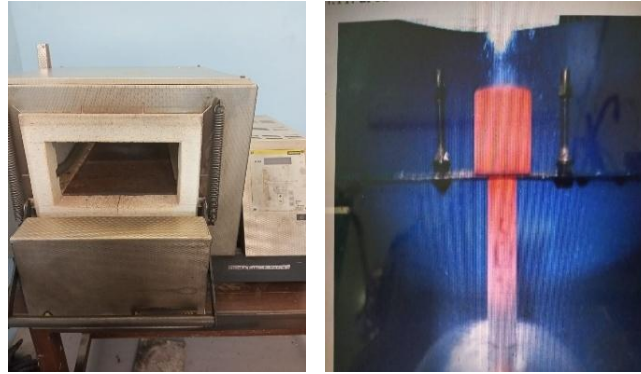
Laboratory furnace used for the pack carburizing heat treatment of ST37 steel specimens.
